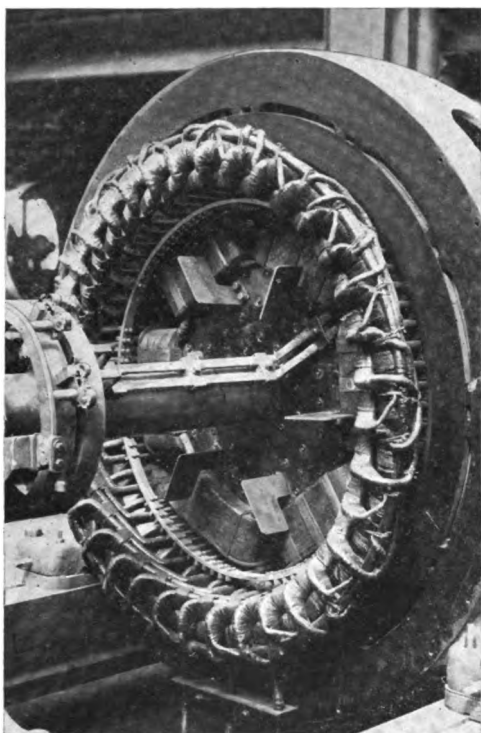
DETAILS OF WINDING OF STATOR AND ROTOR
